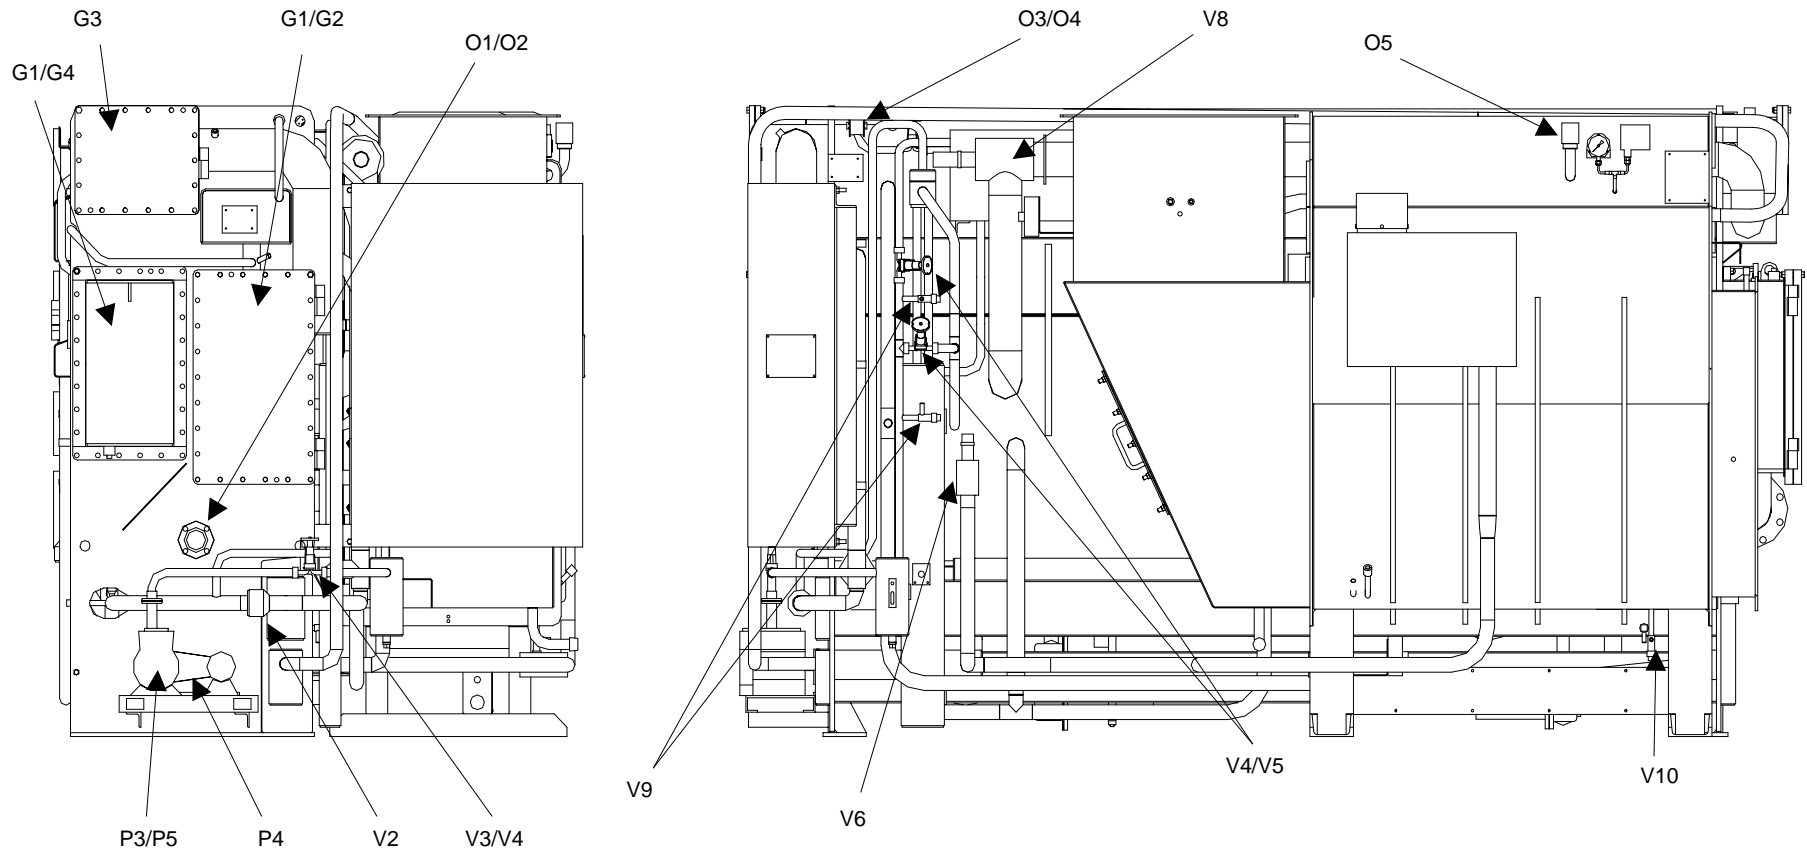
Valve and Components Location, Front and Side Views (16DNP012 Smoke tube type chiller)
